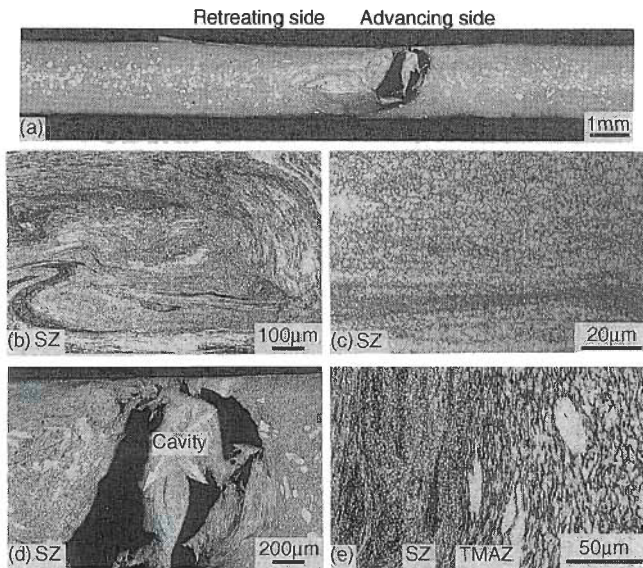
Macro- and microstructures of cross section of FSW joint at tool rotating speed 1240 rpm and travel speed 500 mm/min.
